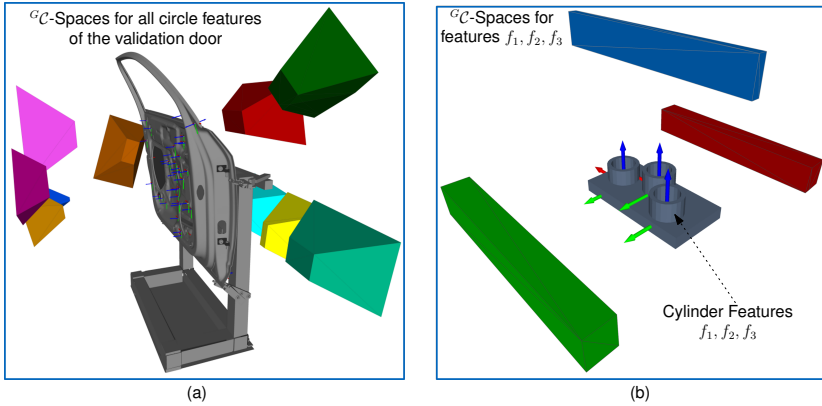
a) Representation of the ten characterized G_C -spaces for acquiring 50 circle features of the car door using the SLS Zeiss Comet Pro AE. Approximate door and fixture dimensions in mm (length, width, height): $1200 \times 500 \times 1600$. b) Representation of three characterized G_C -spaces for acquiring three 3D cylinder features using a laser scanner. Approximate probing object dimensions in mm (length, width, height): $120 \times 60 \times 34$. (modified from MAGAÑA et al. 2023b).
